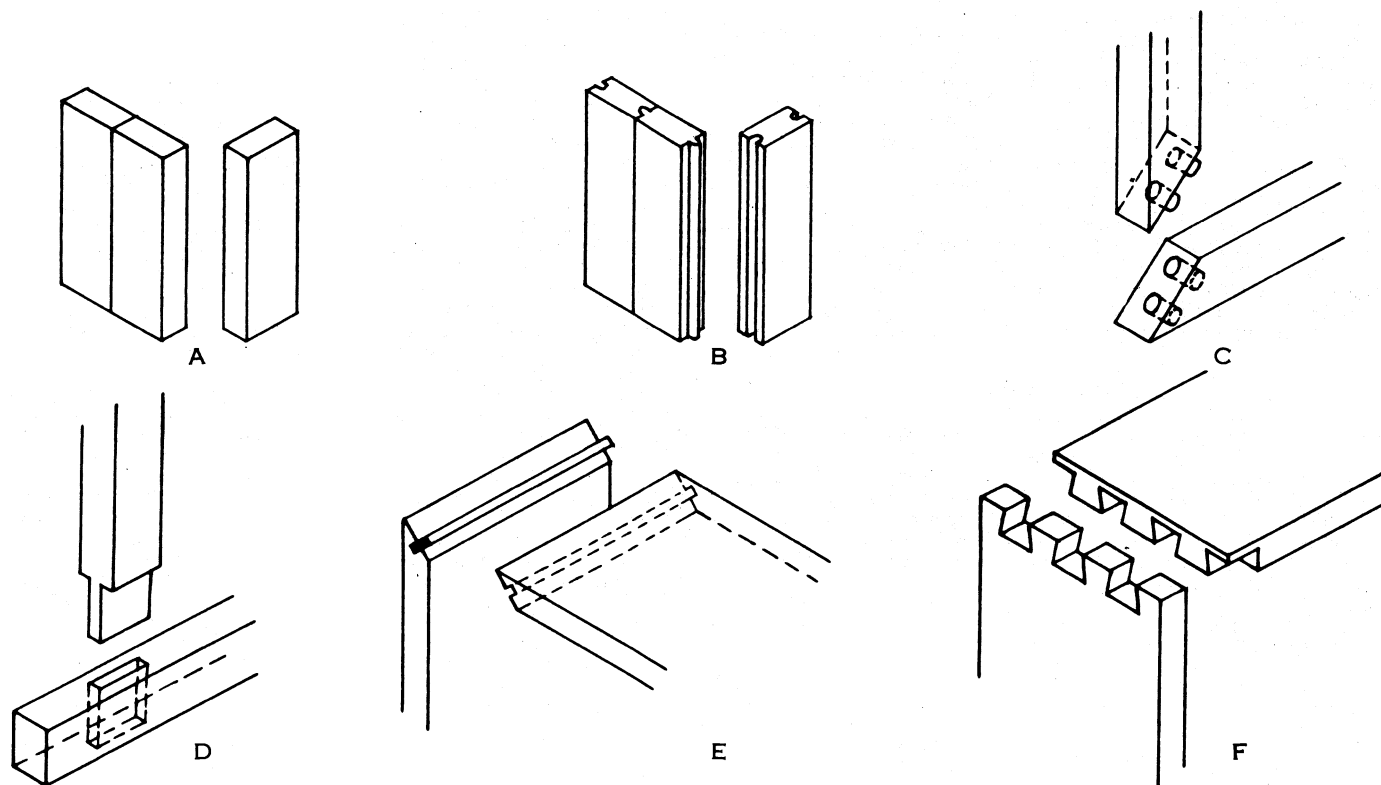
TYPICAL JOINTS USED IN FURNITURE MANUFACTURE: (A) PLAIN BUTT, AND (B) TONGUE AND GROOVE ARE USED CHIEFLY IN GLUED UP PANELS; (C) DOUBLE DOWEL IS THE MOST WIDELY USED JOINT IN UPHOLSTERED FURNITURE; (D) MORTISE AND TENON; (E) MITRE AND SPLINE, AND (F) DOVETAIL ARE USED PRIMARILY IN CASE GOODS CONSTRUCTION
